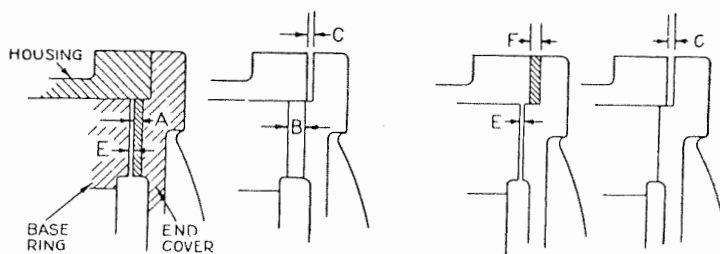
• Measuring end play in bearing. A, regular filler plate. B, dummy filler. C, air gap. E, end play. F, regular filler ring.
